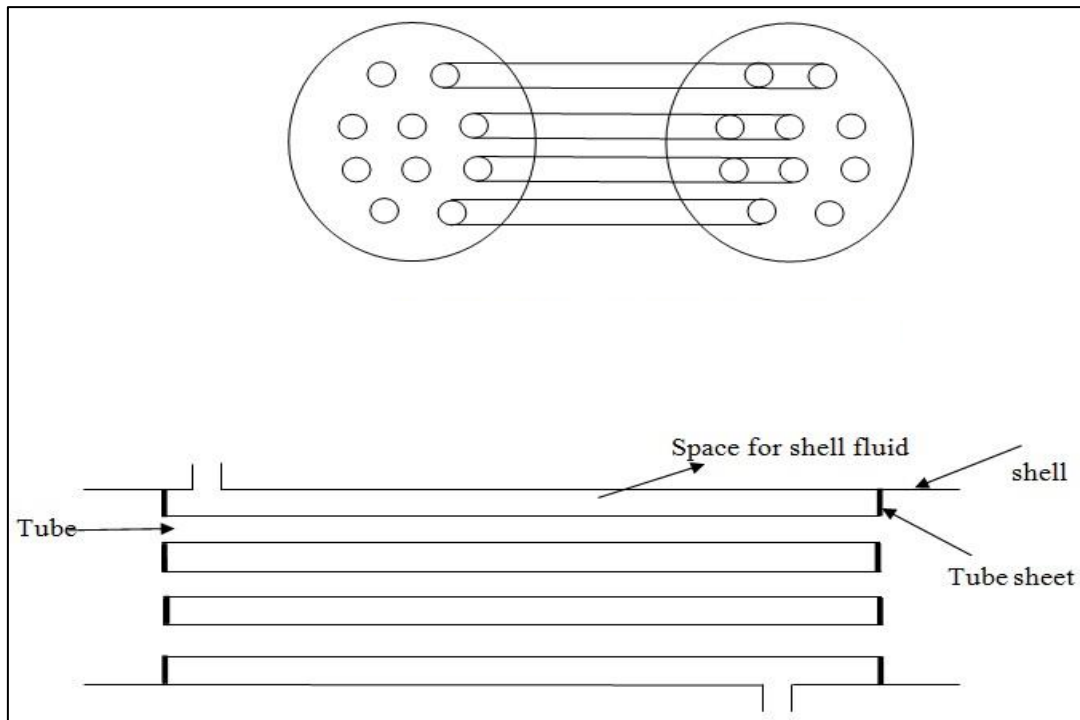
(a) Tube bundle fitted in two sheets (b) Tube bundle inside a shell
